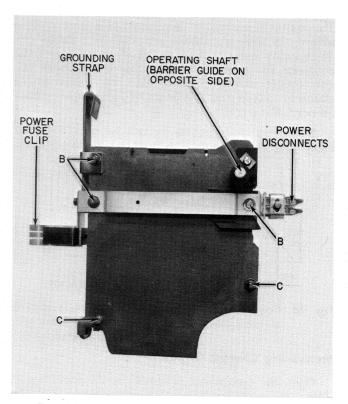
Arc chute assembly with power fuse clip, grounding bar and power disconnects
